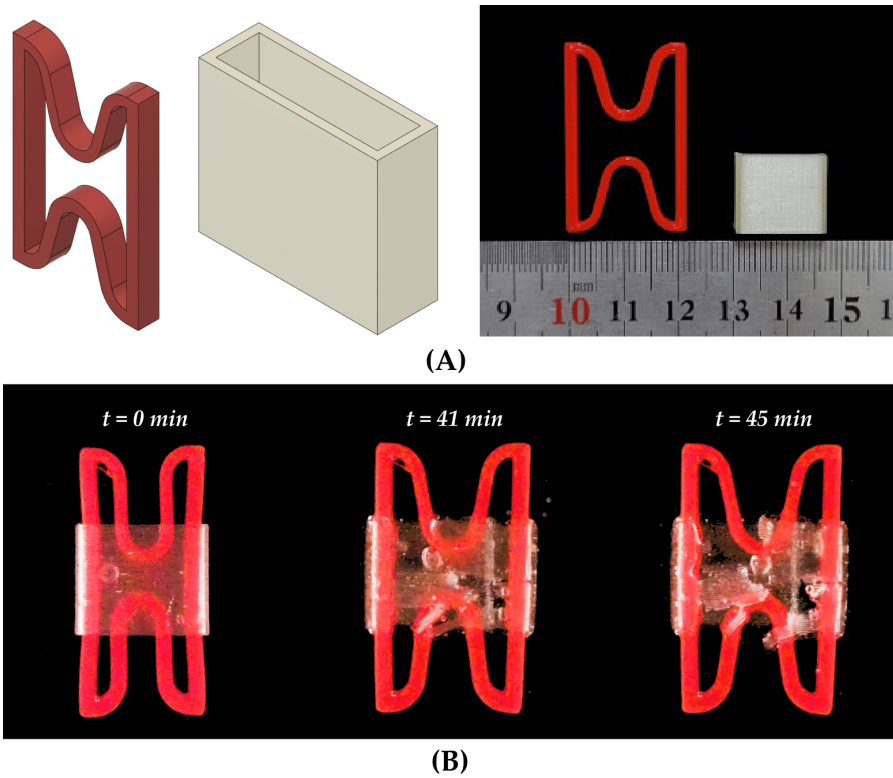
(A) CAD models & prototypes and (B) shape-morphing test for actuator 4.
